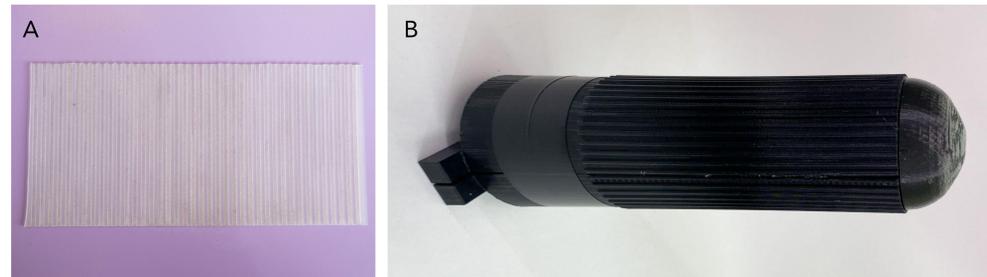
A. Flat silicone sheet fabricated in a 3D printed mold with channels. B. Final 3D printed mold for liquid silicone. This inner mold rests in an outer cylindrical shell to create a single silicone piece with both channeled and non-channeled regions.
